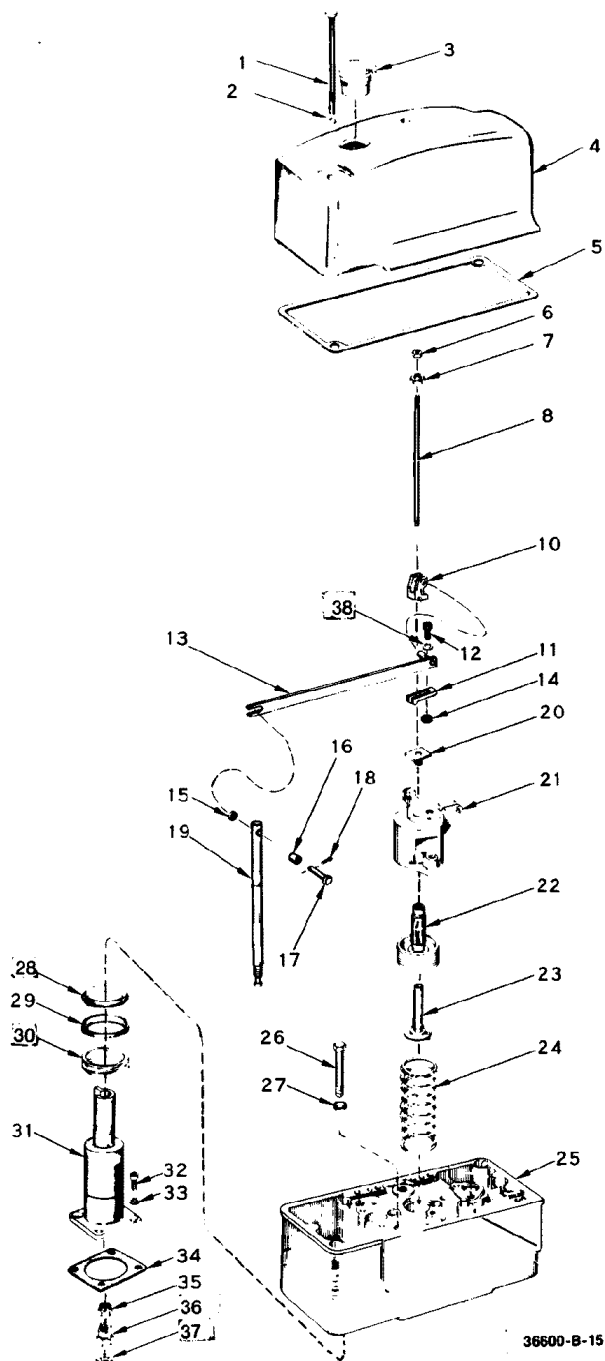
Exploded View, Speed Droop Linkage Assembly (Flat Bar Type)
